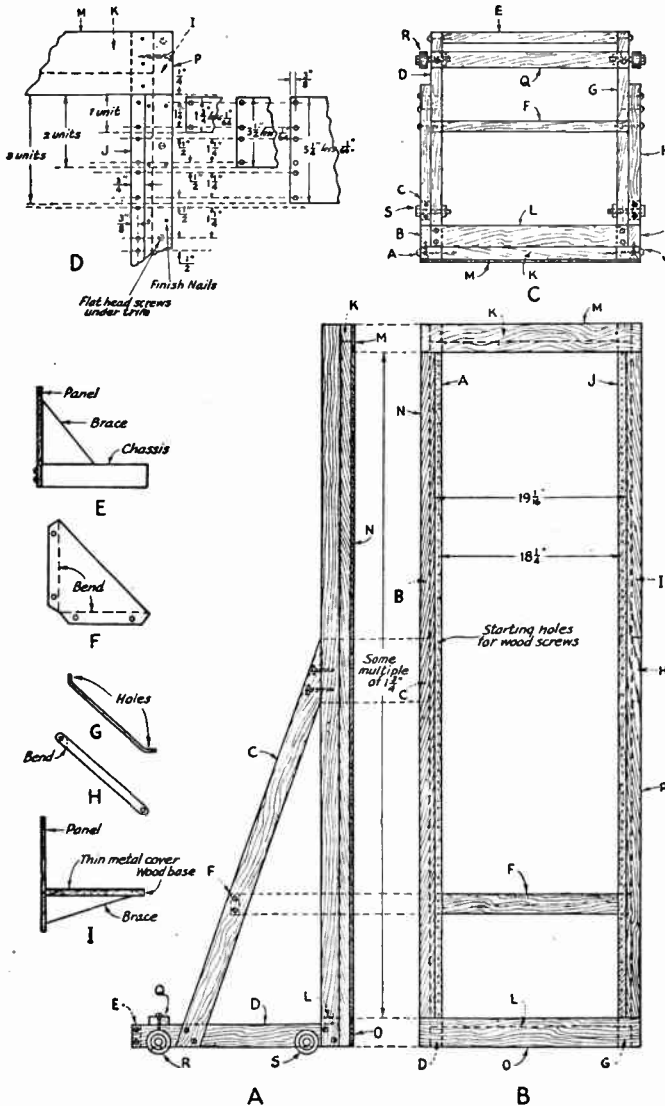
The standard rack. A — Side view. B — Front view. C — Top view. D — Upper right hand corner detail. E — Panel and chassis assembly. F, G, H — Various types of panel brackets. I — Substitute for metal chassis.
